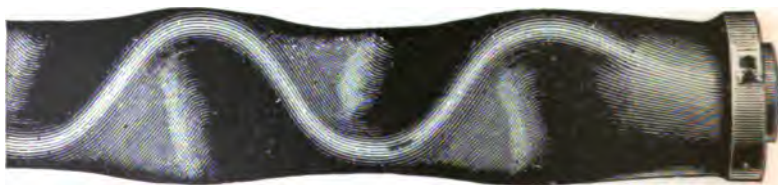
Length of "Row" Tube, such as is used on the Simpson-Bodman Generator for Producing an Enlarged Heating Surface. This cut shows the manner of making the indentations.
